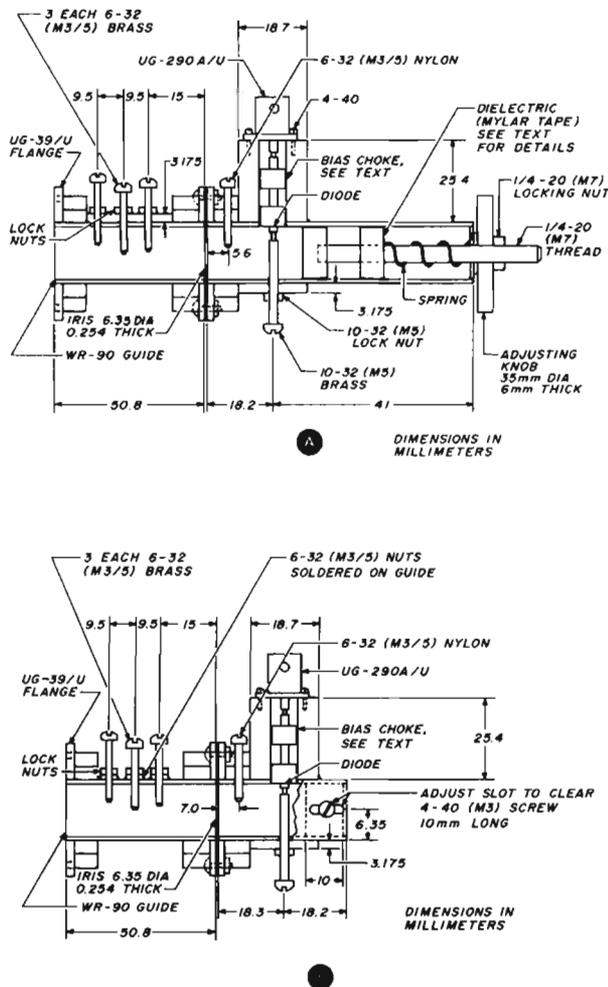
Assembly drawings of two Gunn oscillators. A design using an adjustable choke plunger backshort is shown in A. The oscillator in B has an adjustable contacting backshort that can be locked into place.
